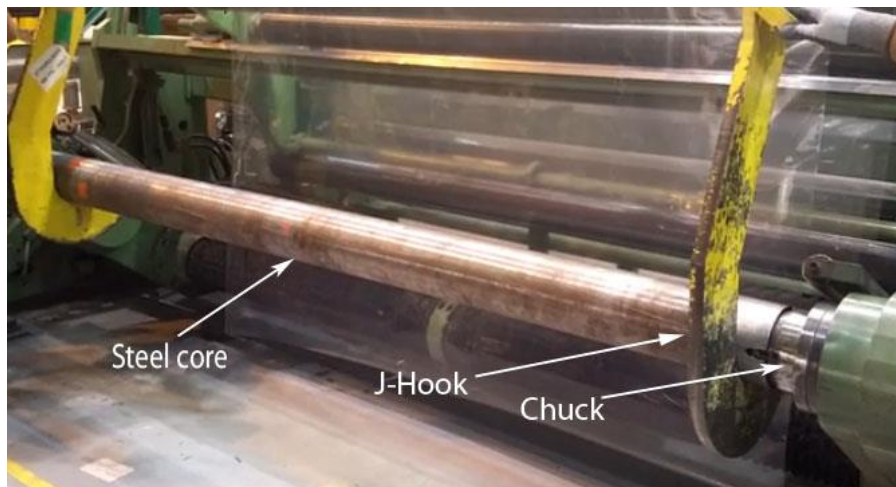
Slitting machine showing the steel core mounted onto the chucks. The chuck on one of the sides is fixed while the other one is free to move outward, along the axis of the core, to allow the removal of the core [3].
